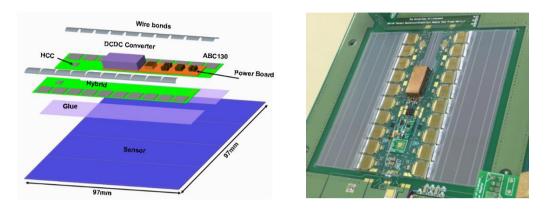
Exploded view of a short-strip module, shown left. Shown right is a photograph of a fully assembled prototype module.
